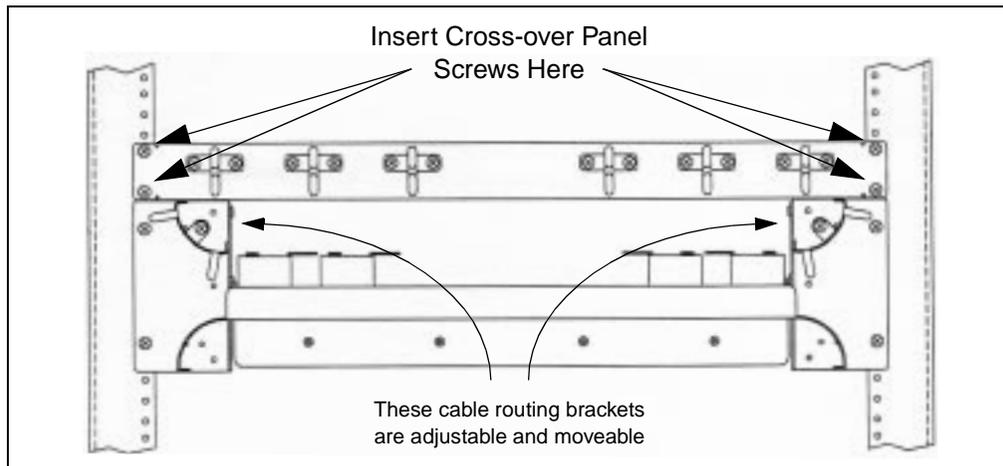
Rear View of Installed Cable Management Tray with Cross-over Panel
